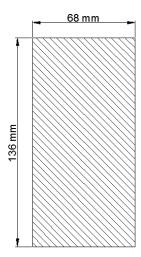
Panel Cut Out Dimensions of SK1200 Level Alarm
